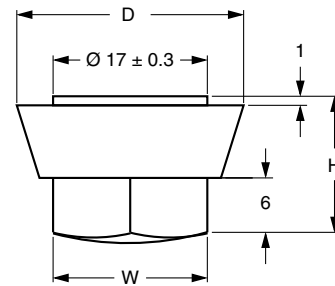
Synthetic cap nut; see Table 2 for dimensions D, H and W
